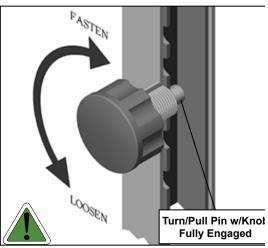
Fig. C Caution: Check that all Turn/Pull Pin w/Knob (#138) to be fully engaged into the selecte holes of the Front Uprights (#4).
